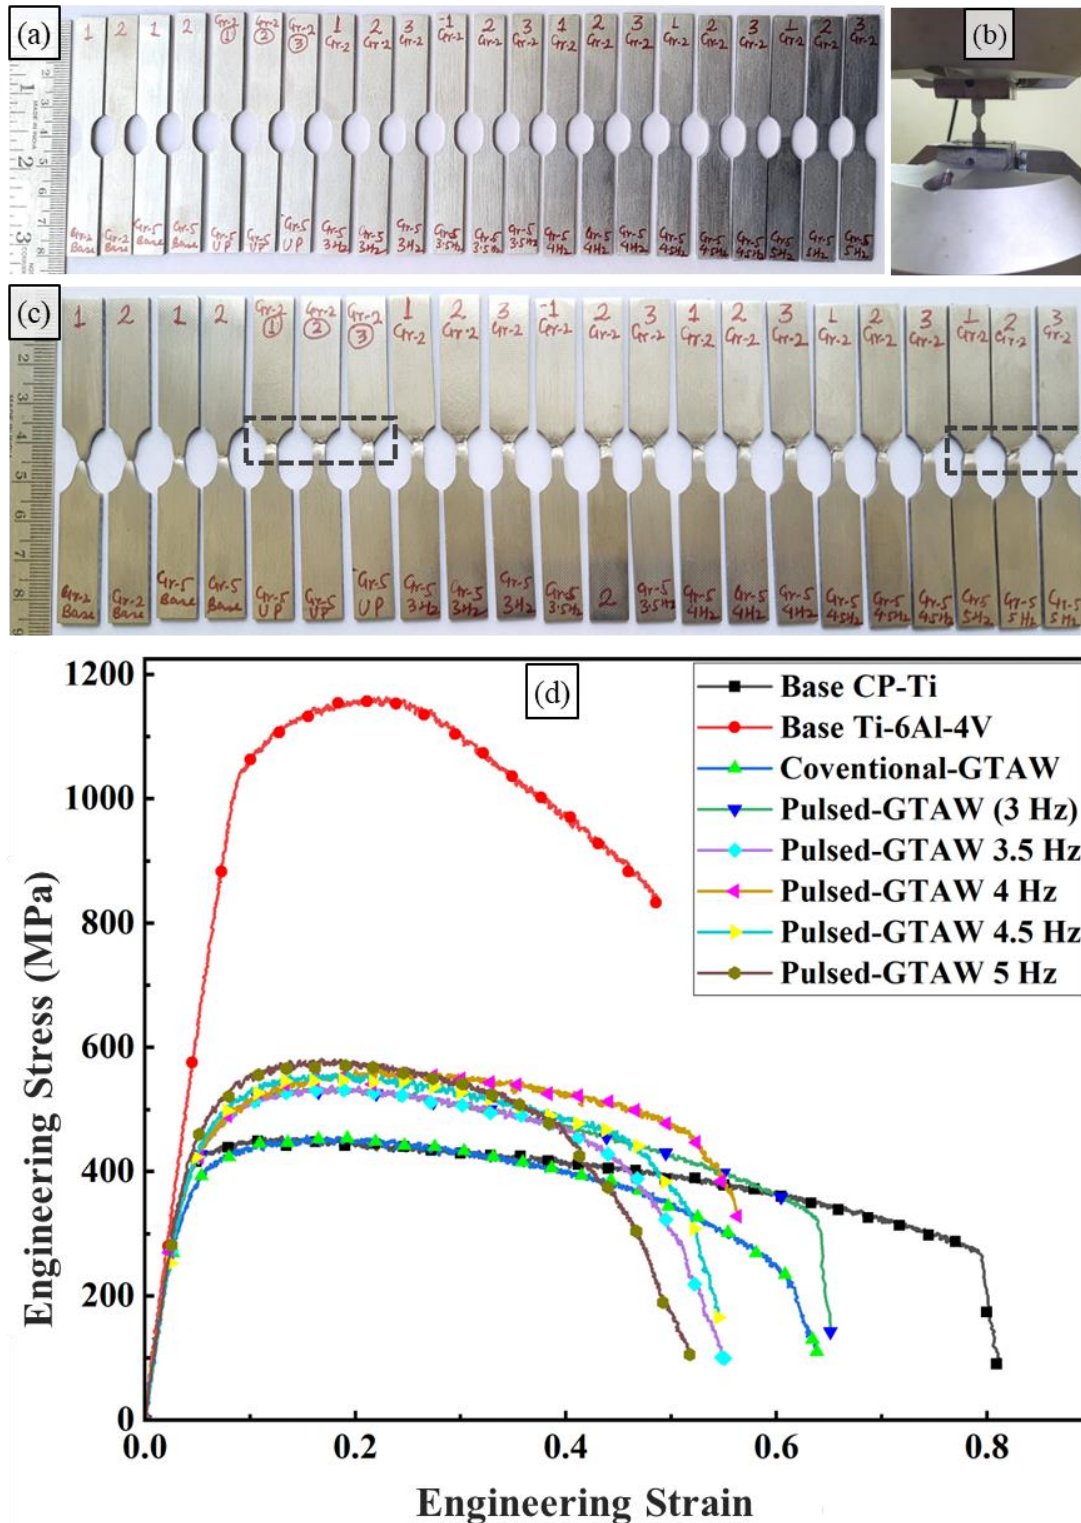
(a) Reduce-section tensile test specimens; (b) sample mounted on UTM; (c) fractured reduced-section tensile specimens; (d) stress-strain diagram for reduced-section tensile test specimen
